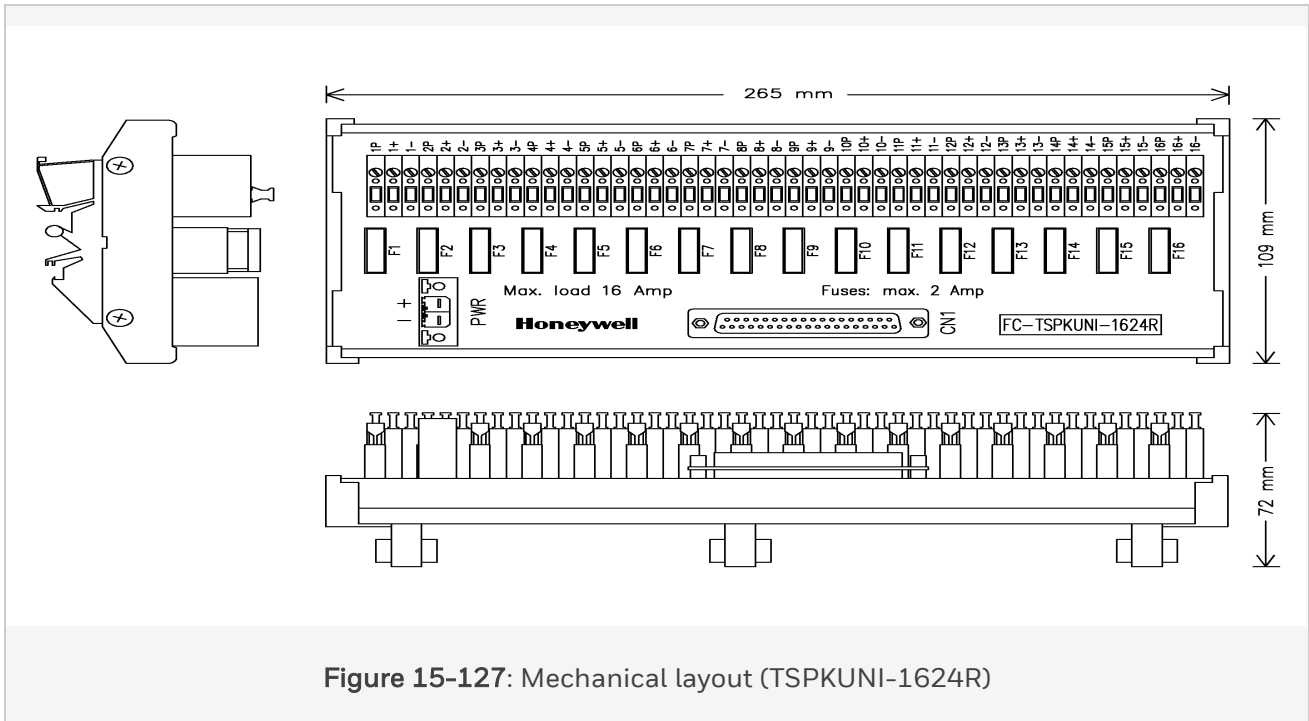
Mechanical layout (TSPKUNI-1624R)
